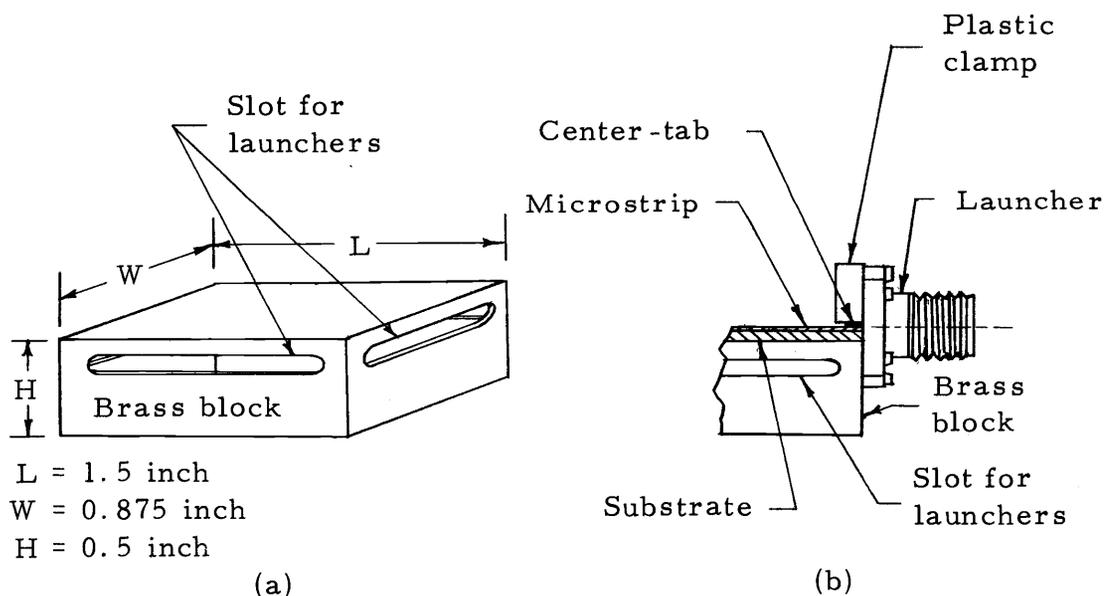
Test fixture for microstrips. (a) Main body of test frame. (b) Coaxial-to-microstrip transition.
